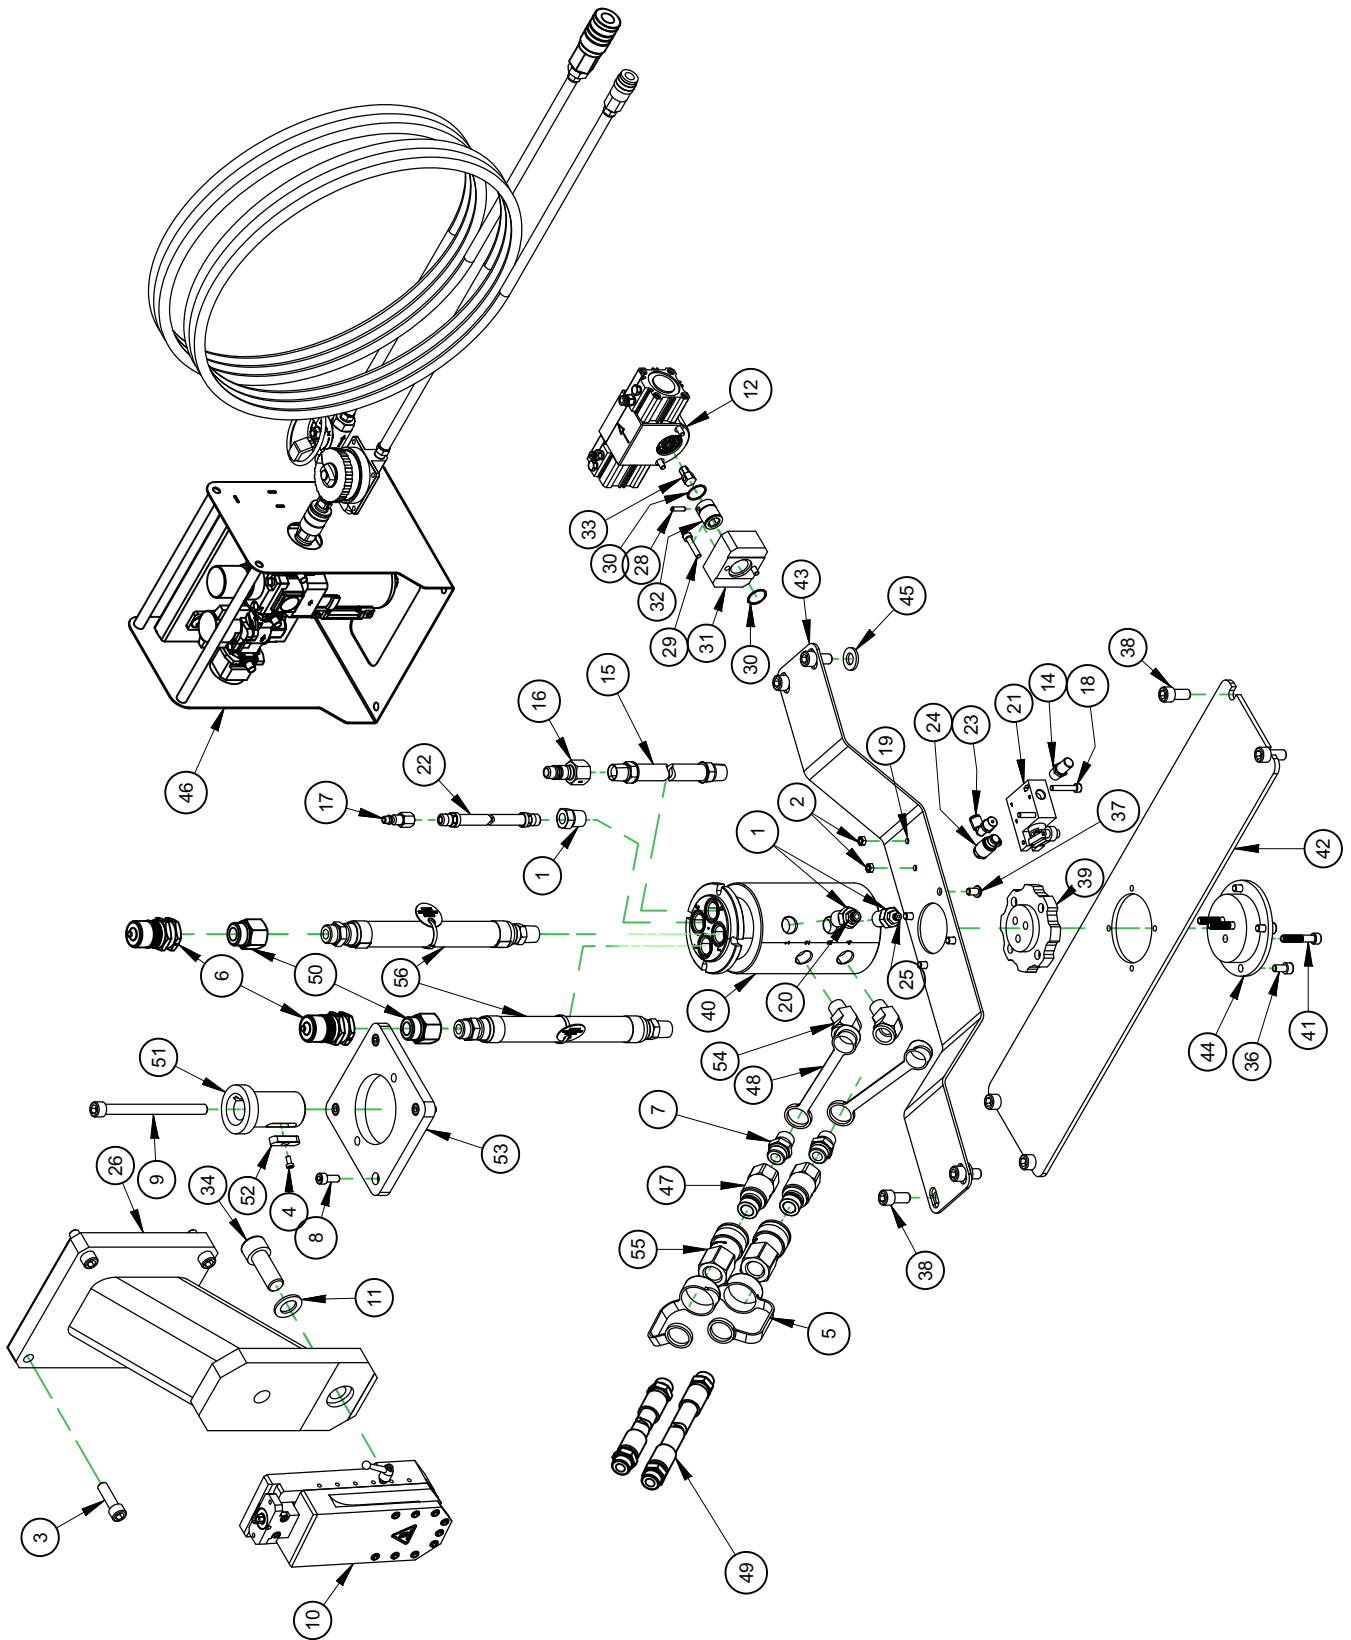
SINGLE POINT EU ASSEMBLY (P/N 83100)
